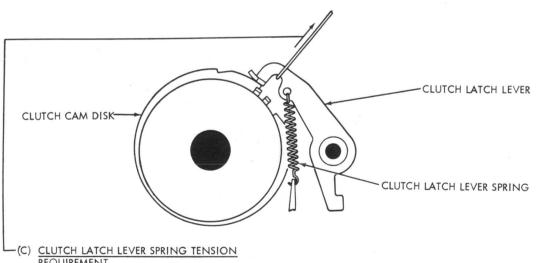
SIGNAL GENERATOR CLUTCH AND GEAR MECHANISM
